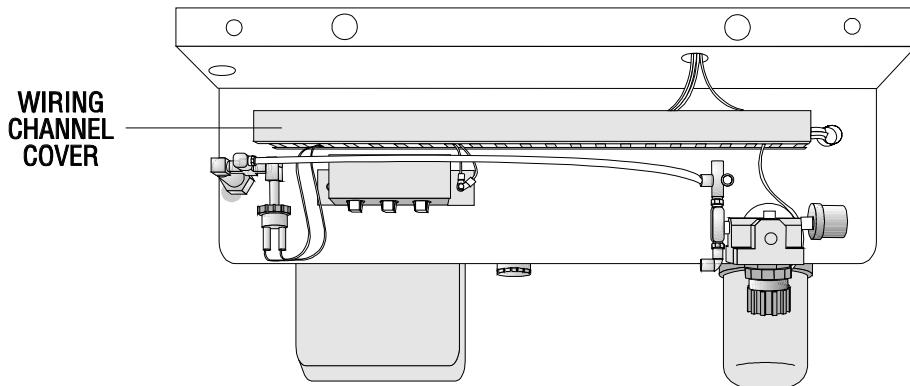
Top view of spindle lube/air solenoid assembly.
